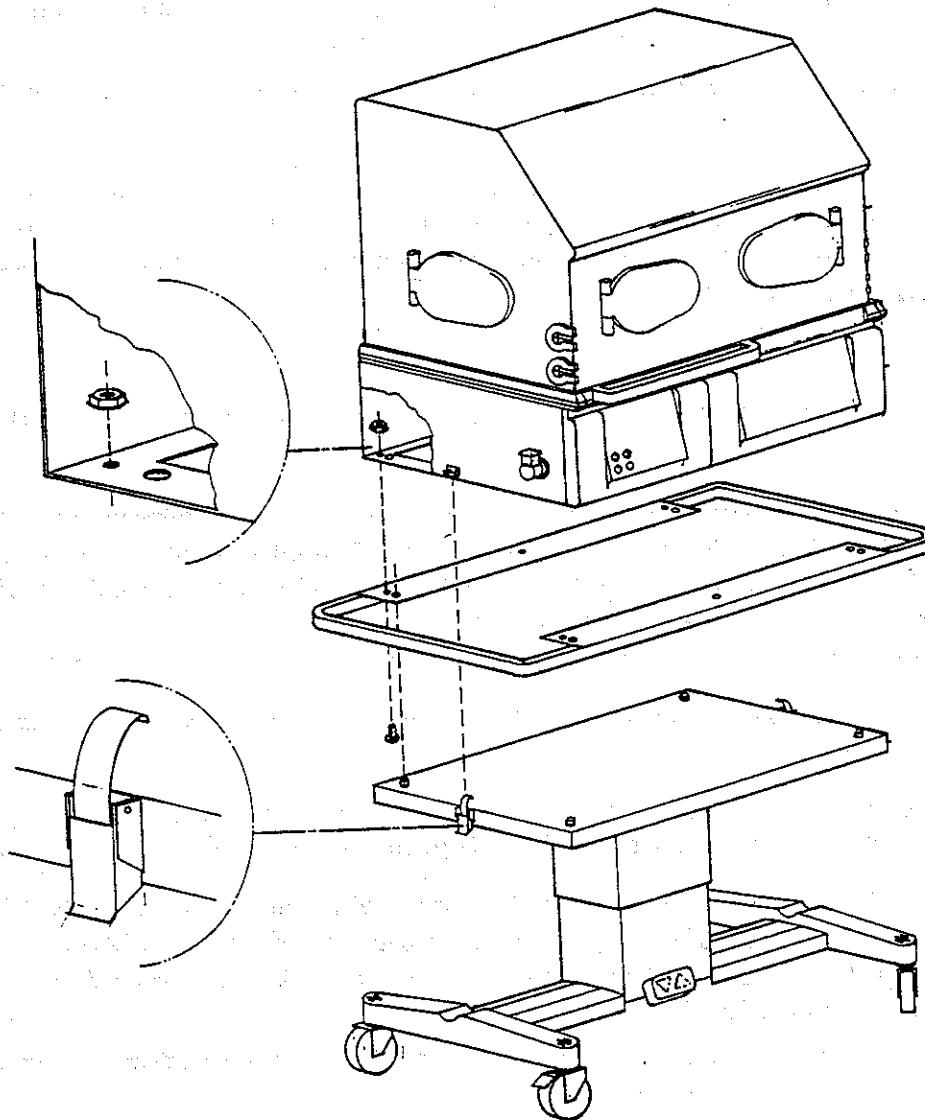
ASSEMBLY, INCUBATOR MOUNTED ON A VHA CABINET STAND
